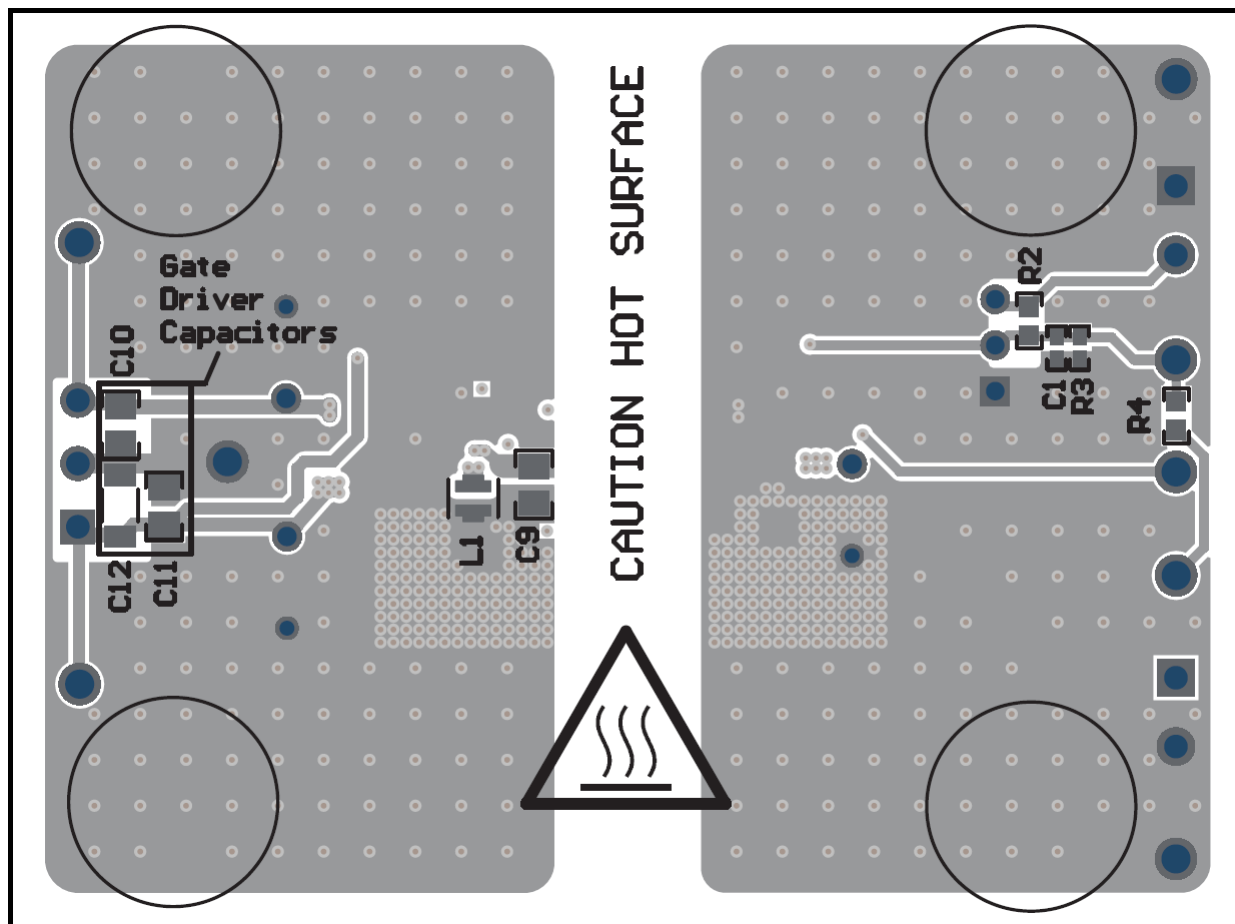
PCB Bottom Layer, Assembly (mirrored view)
